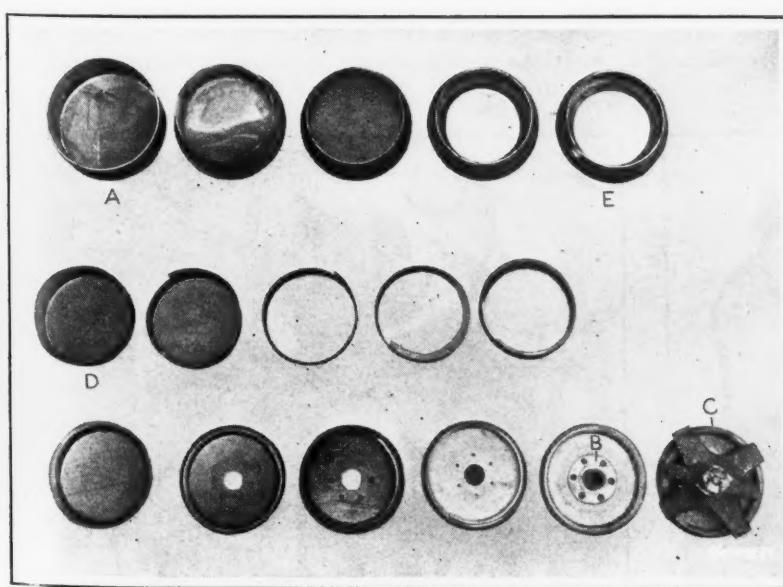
Successive Steps in the Production of Formed Sheet-metal Parts for Cartridge Tanks
